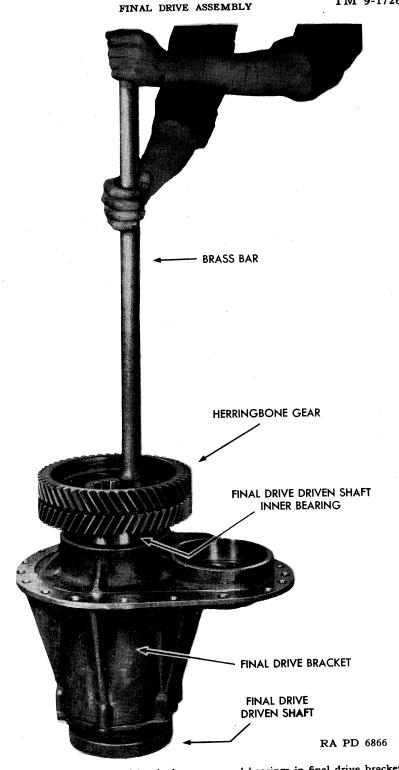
Installation of herringbone gear and bearings in final drive bracket.
